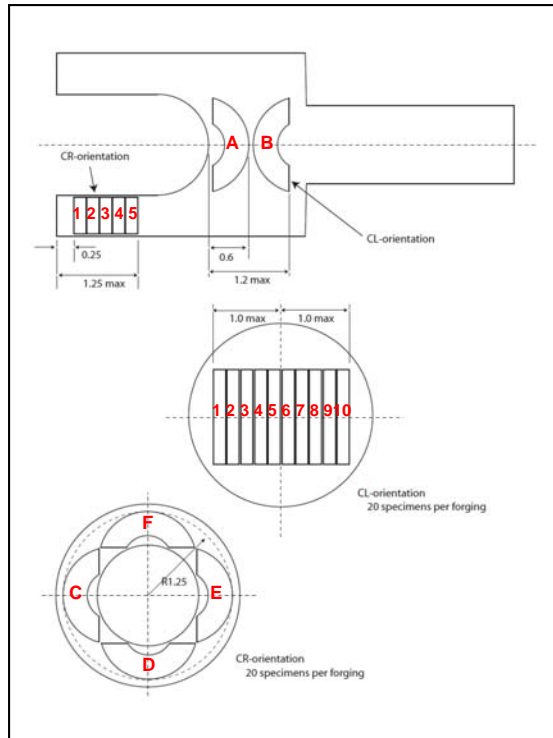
Fracture Toughness Specimen Location and Orientation - Type 316L Forging: Specimens Labeled “A” or “B” were Cut from the Stem Portion of the Forging and Specimens Labeled “C”, “D”, “E”, or “F” from the Cup Portion of the Forging.
